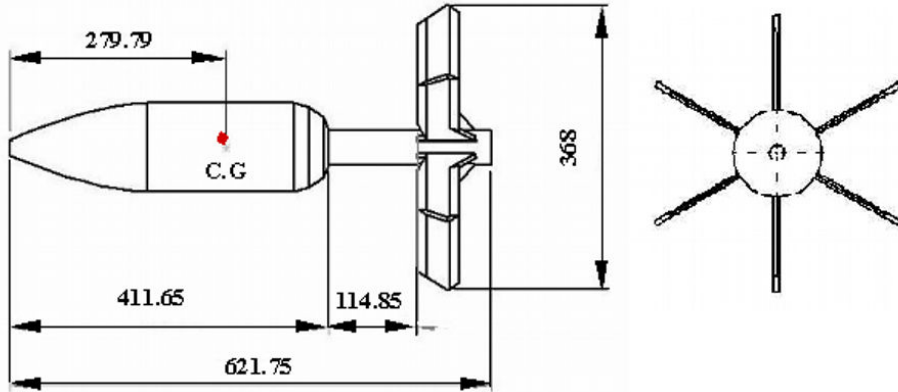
A schematic for STM model (all dimensions in millimeters).
